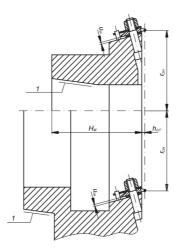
Klingelnberg two – part cutter with ring blades; 1 – base surface
